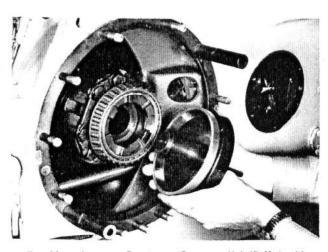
Locating Bearing on Centering Hub (Diff. Lock)
